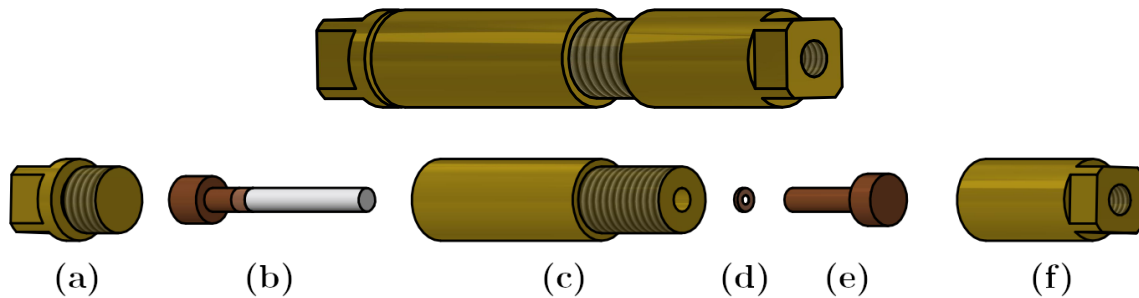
CamCool manufactured SQUID piston cylinder cell. The outer diameter of the cell body is 8.6 mm, with the PTFE cap enclosing the sample space having an inner diameter of 1.4 mm. (Bottom) exploded view: (a) bottom lock nut, (b) bottom piston, copper ring, and PTFE cap assembly, (c) cell body, (d) anti-extrusion disk, (e) inner piston, (f) top lock nut.
